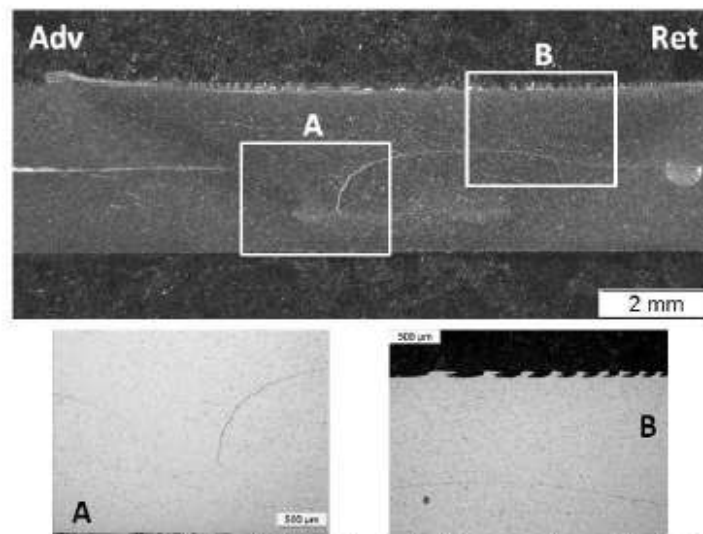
Cross-section of FSW lap joint performed with a non-threaded - 2,5 mm long probe tool at 1500 rpm - 150 mm/min.
